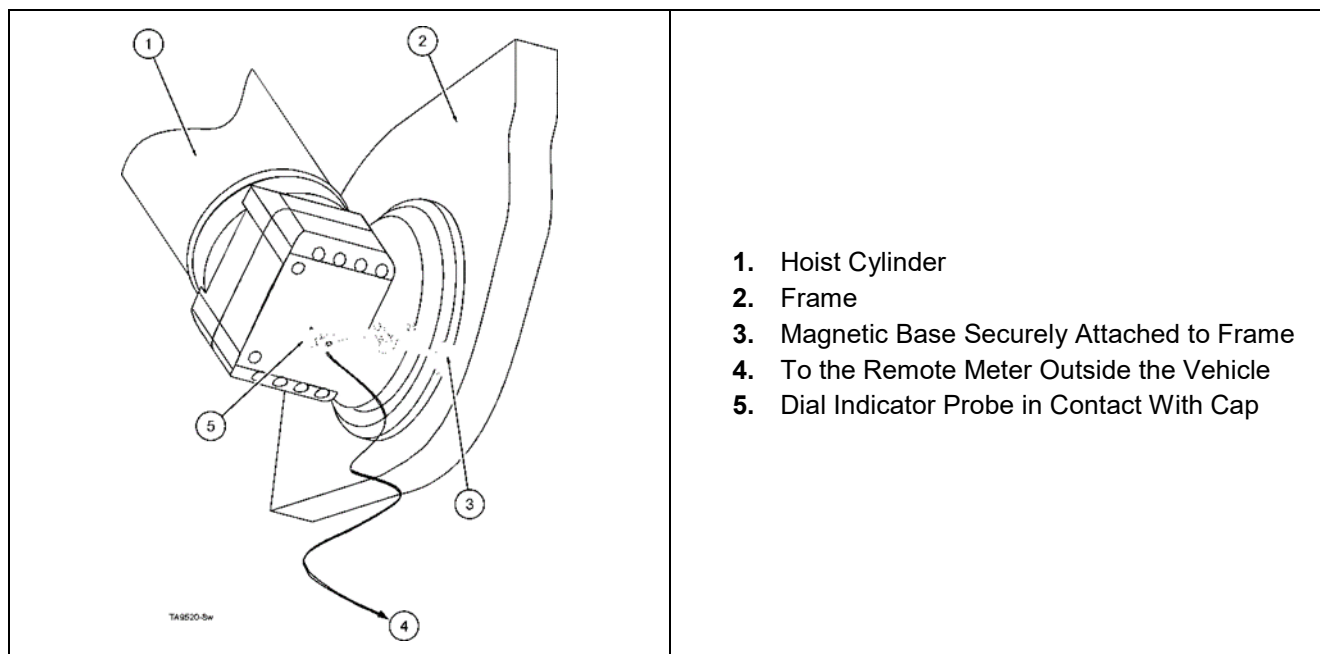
Typical indicator setup for measuring endplay in ball and cap assembly
